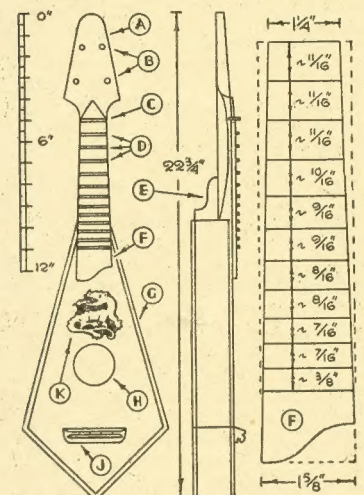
Front and side elevation, with fingerboard shape and sizes
